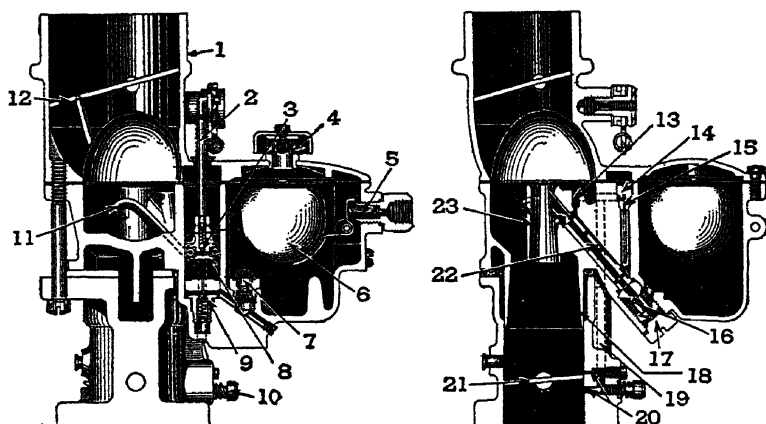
Schematic View Stromberg EE-23 Carburettor.
